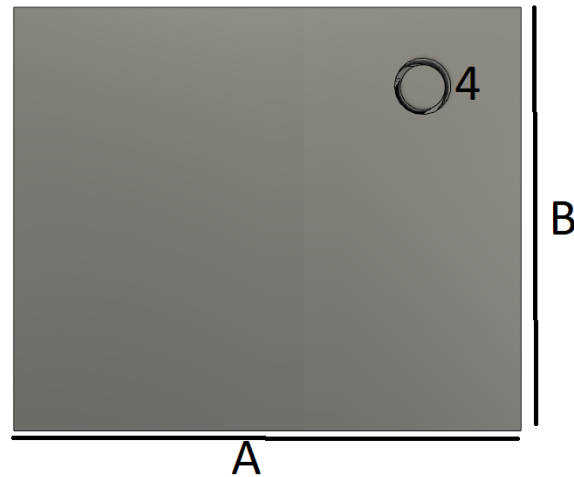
Housing side view of the temperature/humidity sensor hole
